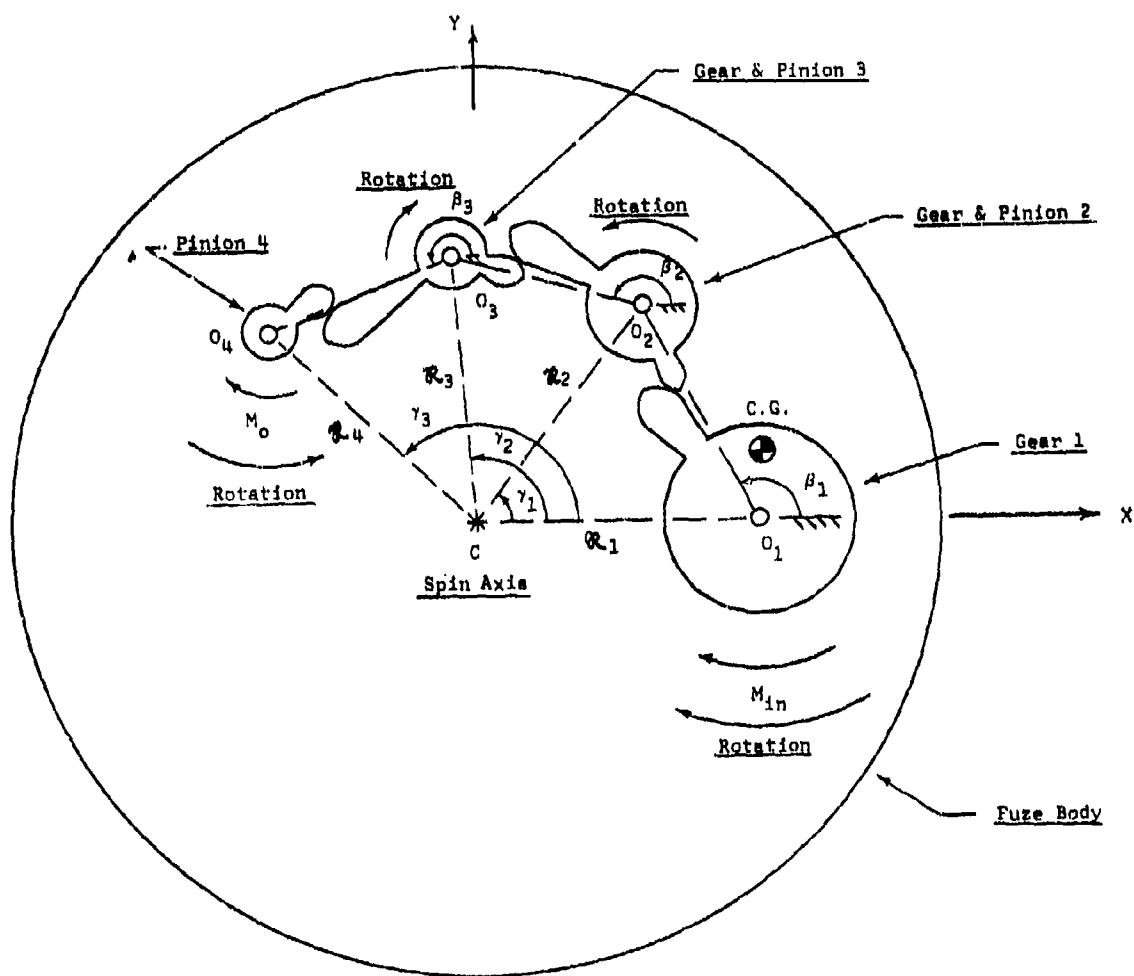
Basic configuration of three pass step-up gear train (shown with clock gear teeth)
